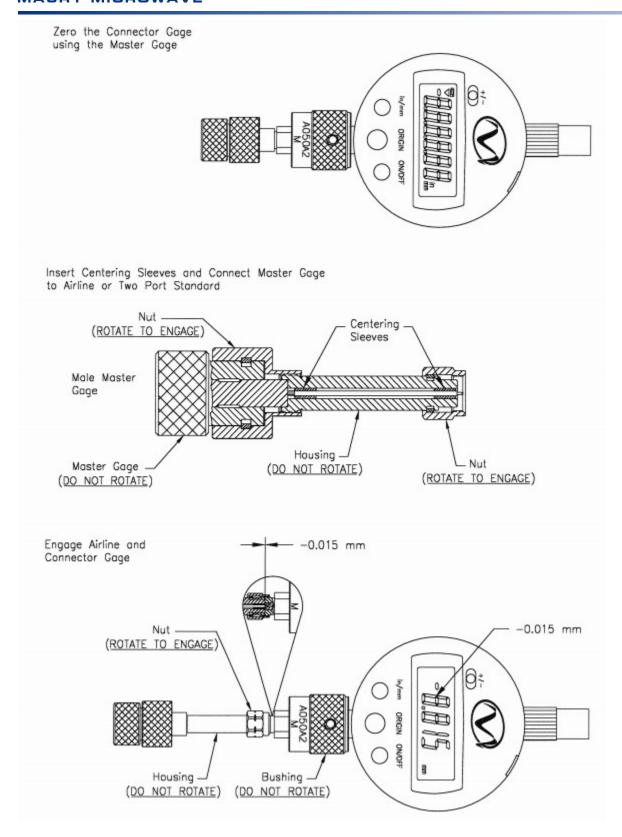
Gaging Beadless Precision 2.92mm and 3.5mm Airlines
